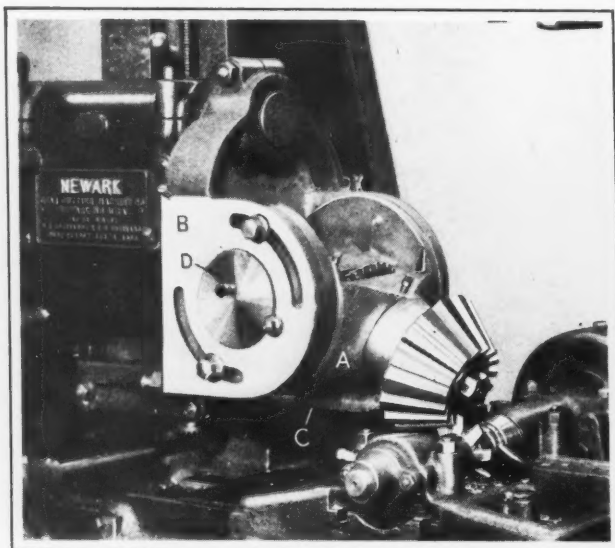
Attachment which Enables Bevel Gears to be Roughed out on Newark Gear-cutting Machines
